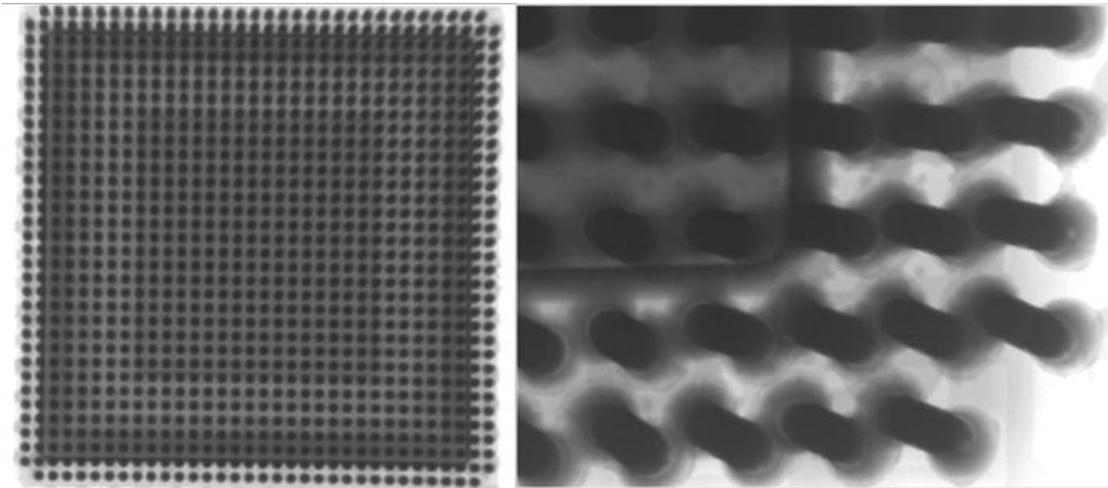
X-ray imaging of the CCGA 1152 assembled board prior to thermal cycling
